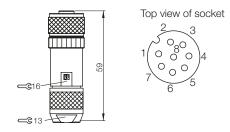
Connector BCC M478-0000-1A-000-43x834-000
